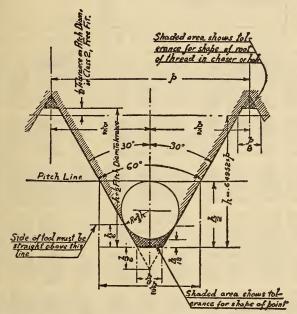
Shape for teeth of chaser or hob not intended to trim crest of thread
